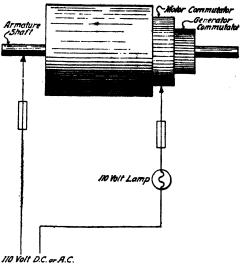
Diagram for Locating Grounded Motor Coil with Lamp-Testing Set
